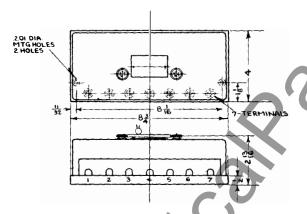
Outline and Drilling Plan for Phase Shifting Transformer used with 3-Phase, 3-Wire Varmeter
